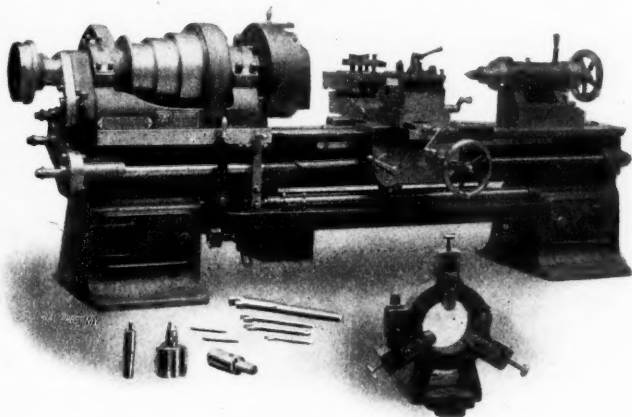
Eighteen-inch Hollow Spindle Lathe for Operating on Bars four inches Diameter or less.
